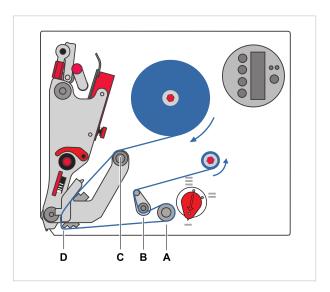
Parts where ribbon residue gathers: A = Ribbon roller, B = Deflector roller with stress relief, C = Deflector, D = Deflector tab on print head
